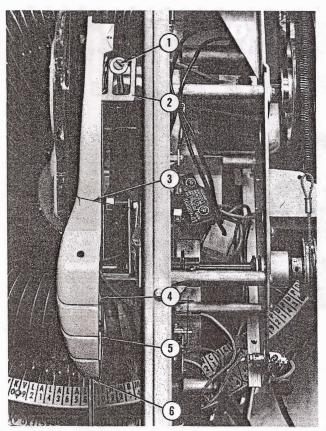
TONE ARM BALANCING ADJUSTMENT
